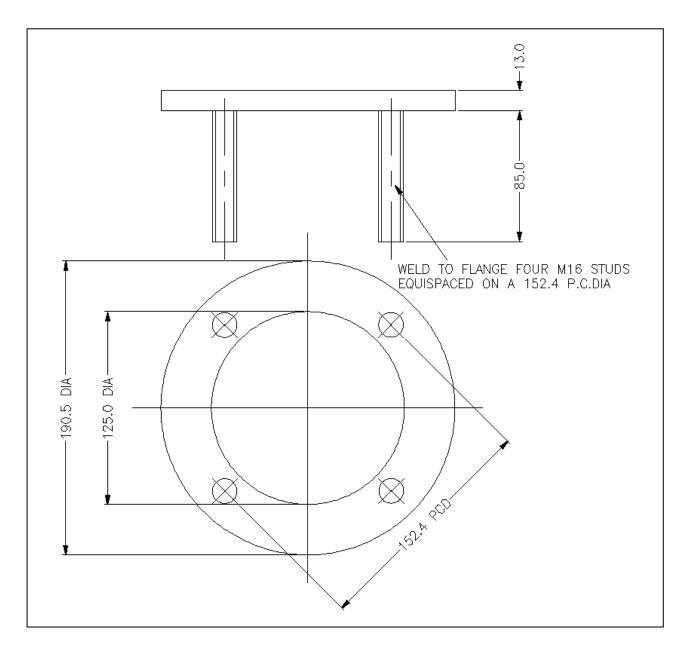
Flange Mounting (Protea Part 3-0169)
